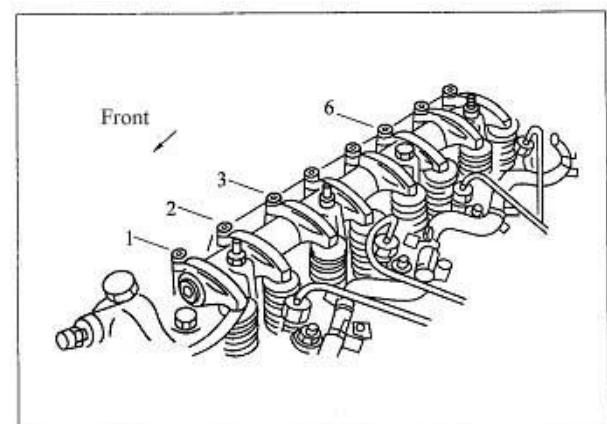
Adjust the 1st,2nd,3rd, and 6th Valve Clearances
